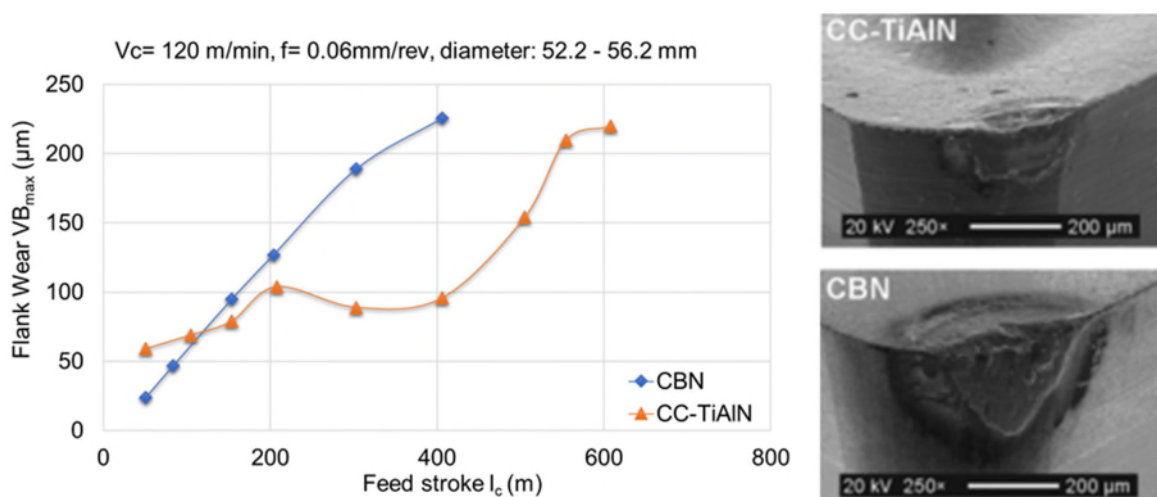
Tool wear of CBN and coated tungsten carbide tools (CC) in boring Ti-46Al-0.5Mo-0.8Cu-0.2Si (adapted from [44]).
